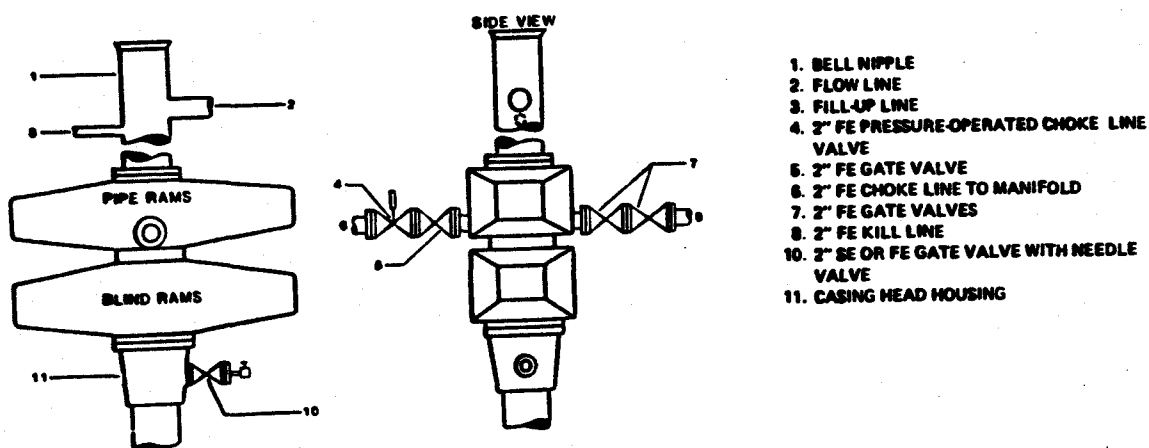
Standard Hydraulic Blowout Preventer Assembly
